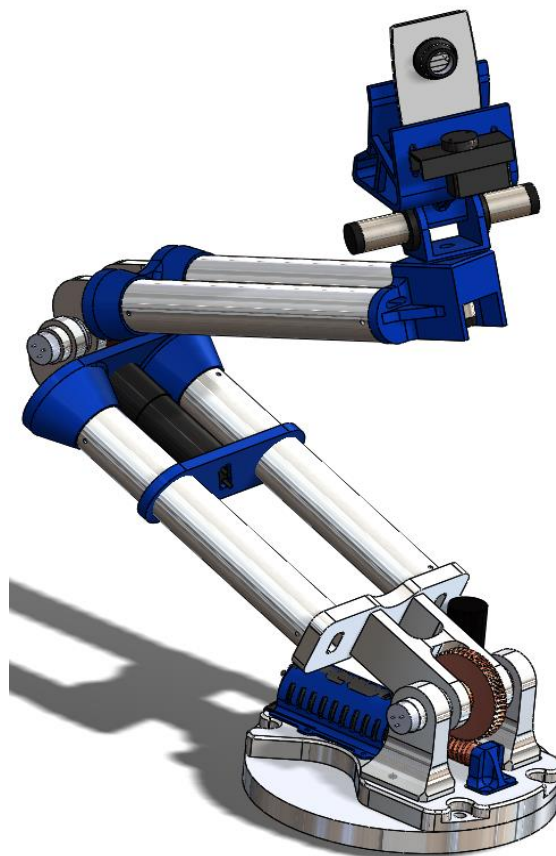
image of Assembled arm, including camera, end effector actuator and all driving
